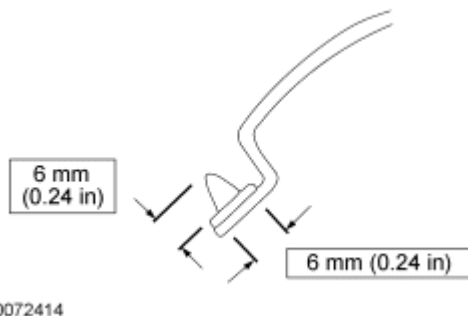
Applying A Bead Of Urethane Adhesive To Pinch Weld
